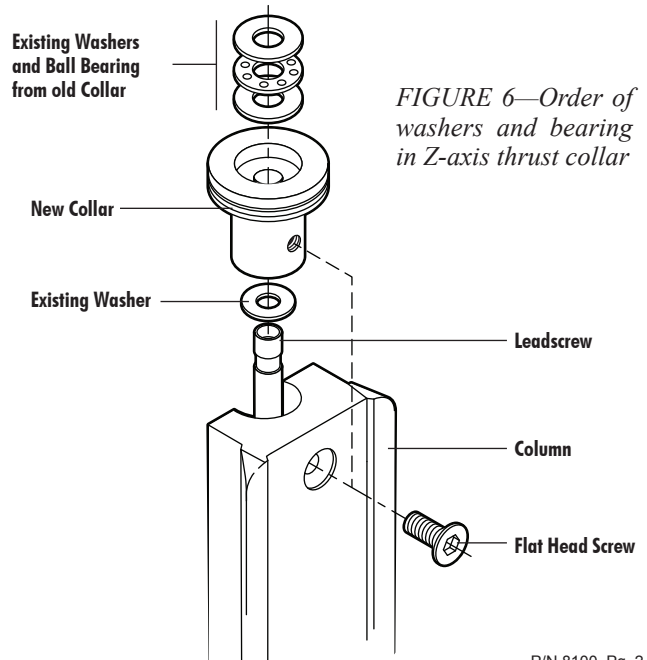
Order of washers and bearing in Z-axis thrust collar
